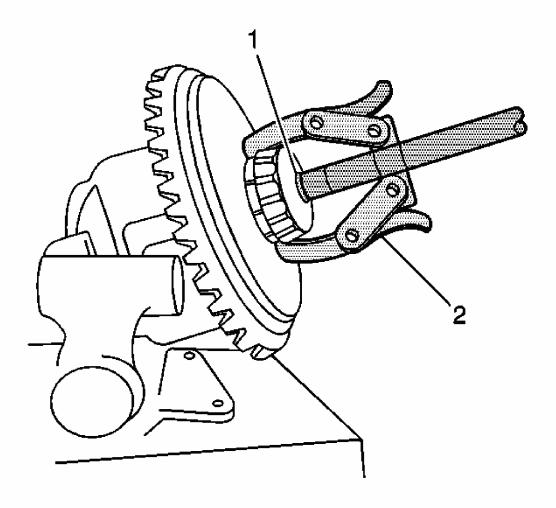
Removing Differential Side Bearing Courtesy of GENERAL MOTORS CORP.
